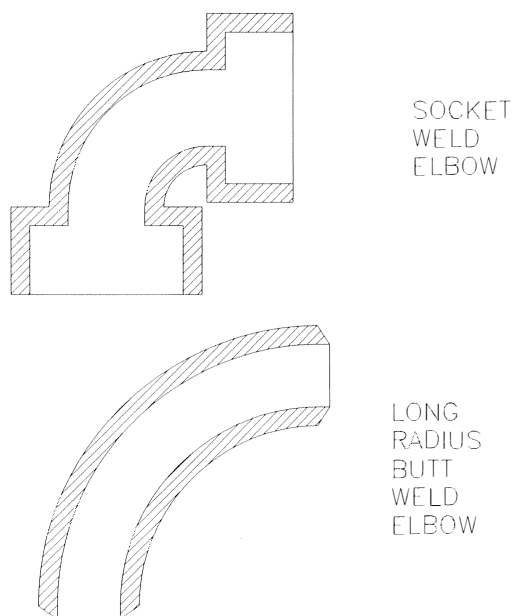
Socket Weld and Butt Weld Elbows.
